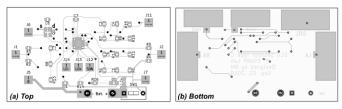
Layout of the PCB: (a) Top layer and (b) Bottom layer.
